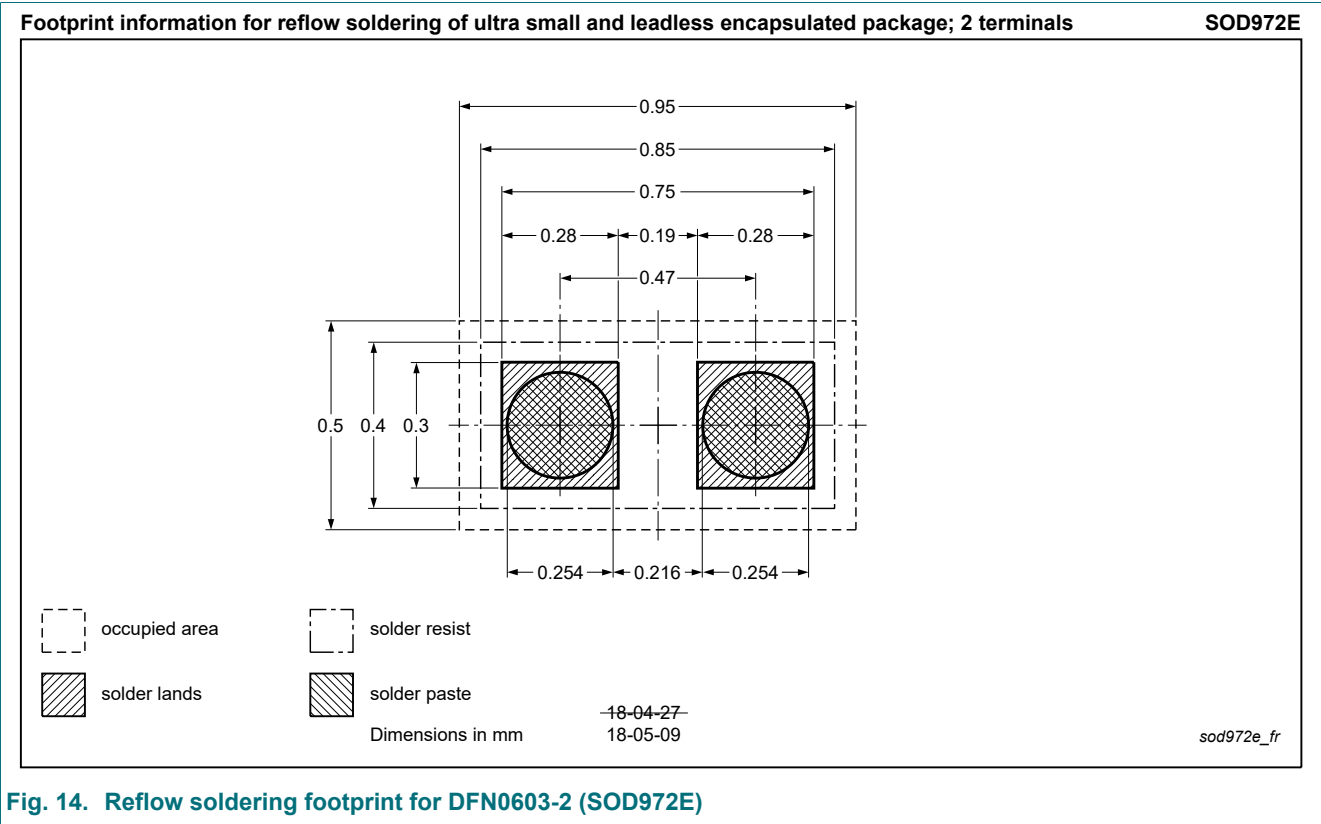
Reflow soldering footprint for DFN0603-2 (SOD972E)
